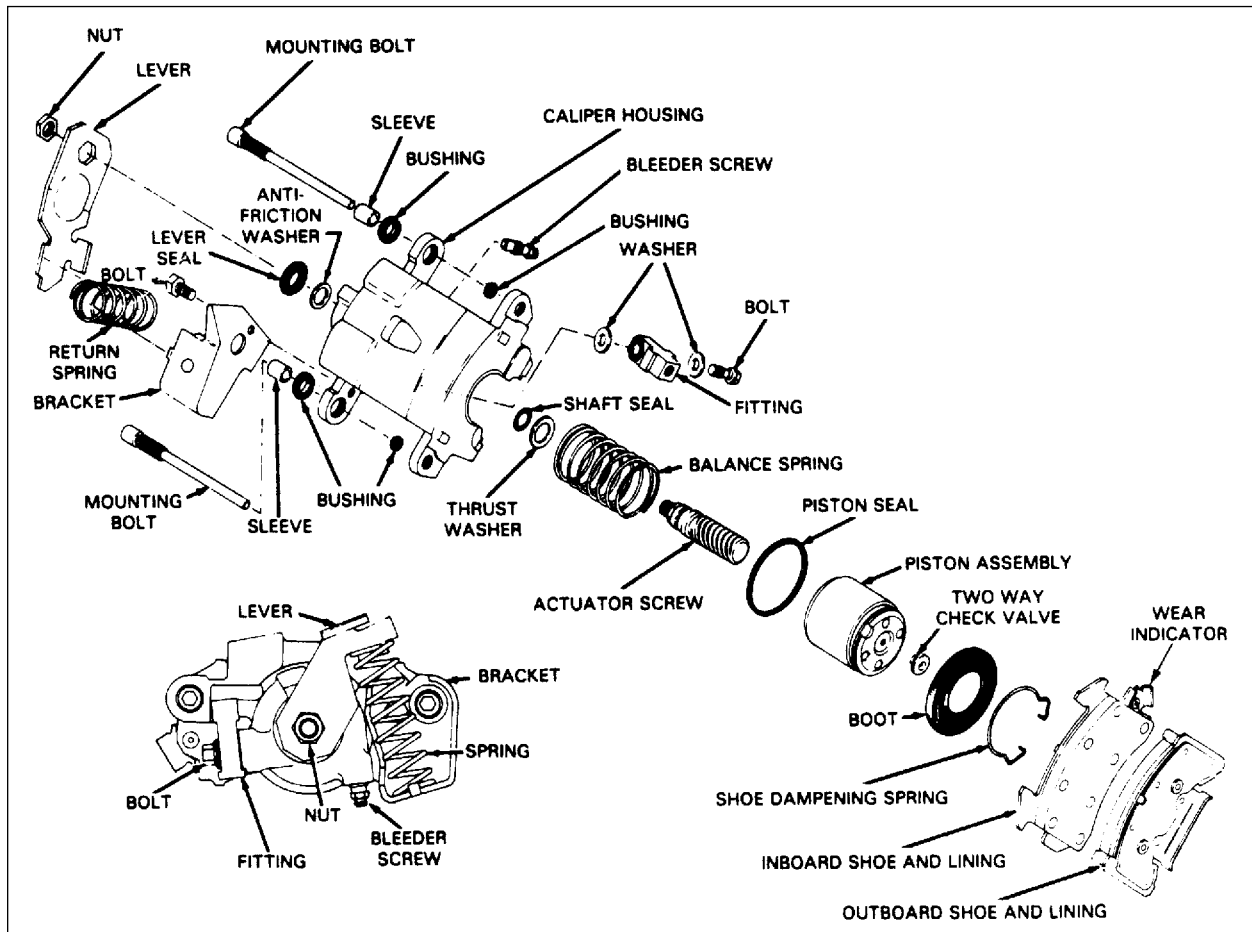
Exploded view of a rear caliper using an integral parking brake arrangement.
